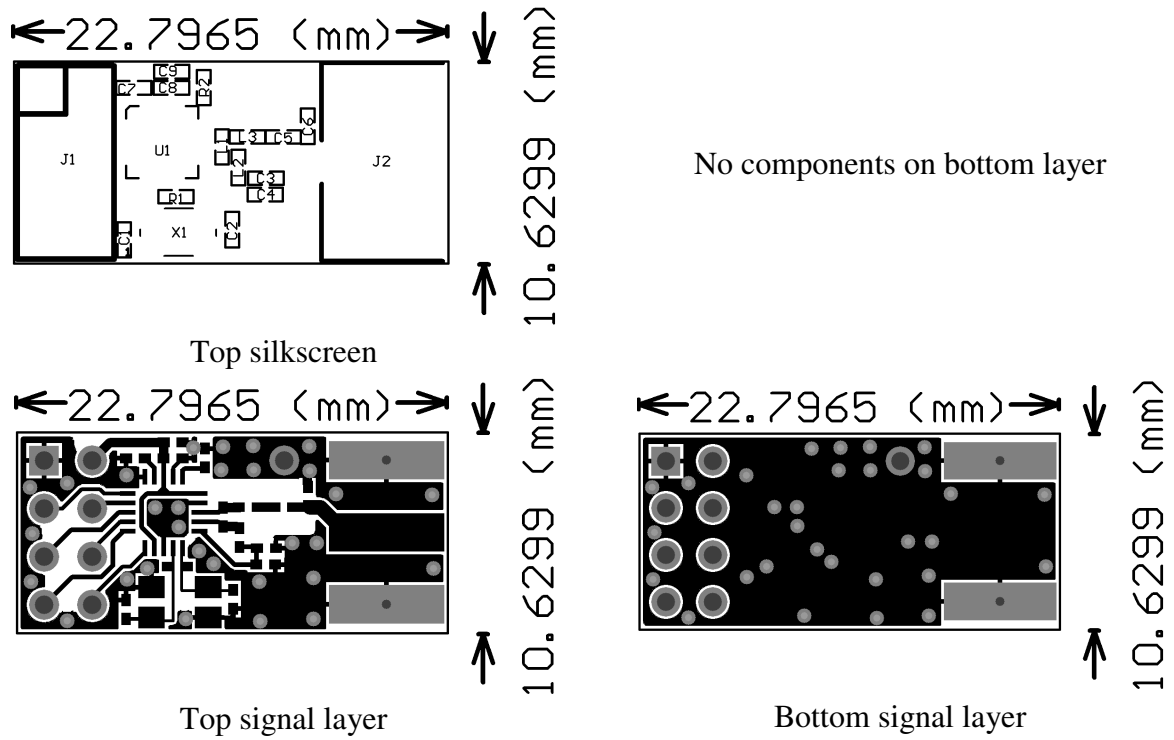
nRF24L01+ REFMOD with SMA connector PCB layout
